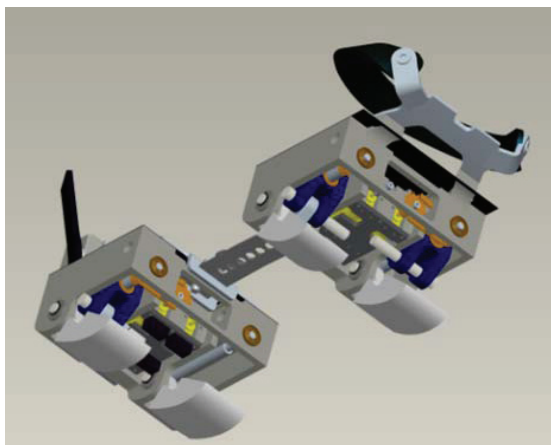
3D CAD drawing of the STRATH Shoe [5]
